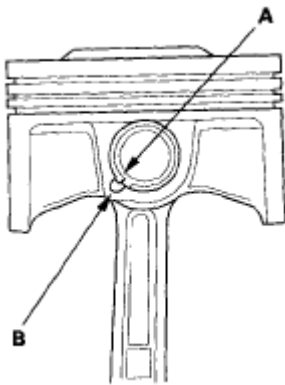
Identifying Piston Pin Snap Rings And Piston Pin Bores
